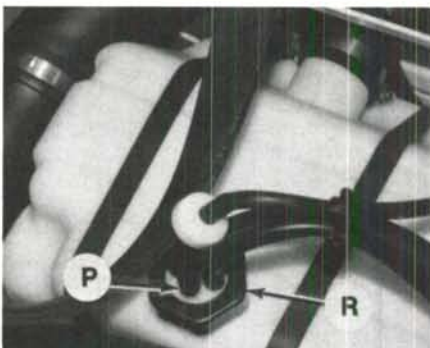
Ring nut (R) secures pickup assembly (P) in fuel tank.
